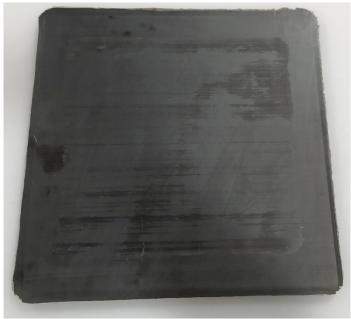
35 Ply Teijin Q183 Flat Panel Tool Side Surface Finish
